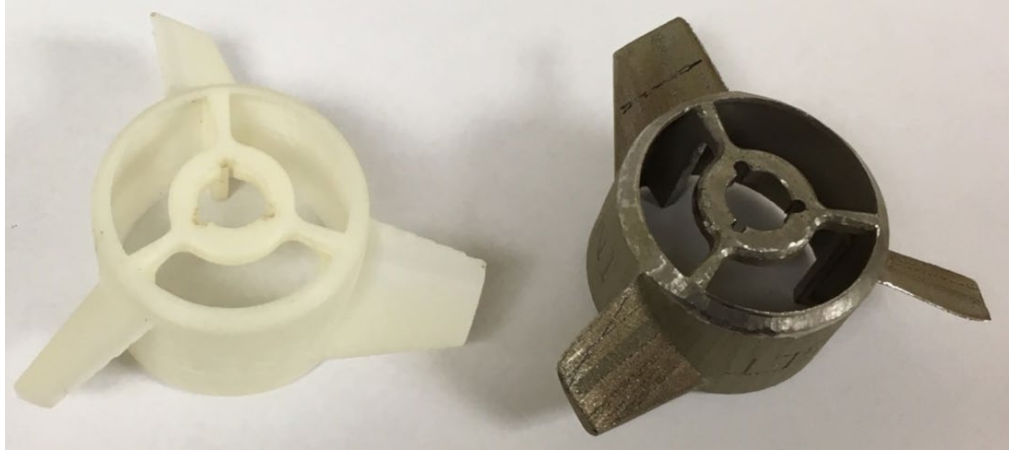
Initial plastic (left) and metal (right) 3D printed propellers for a turnigy outrunner motor.
